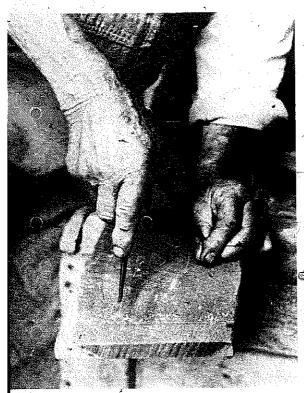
Step 10: Use cedar board(s) for the head (the bottom of the churn). Use any size board and as many pieces of board as needed to make the proper size circle. Use a compass to mark the proper size.
